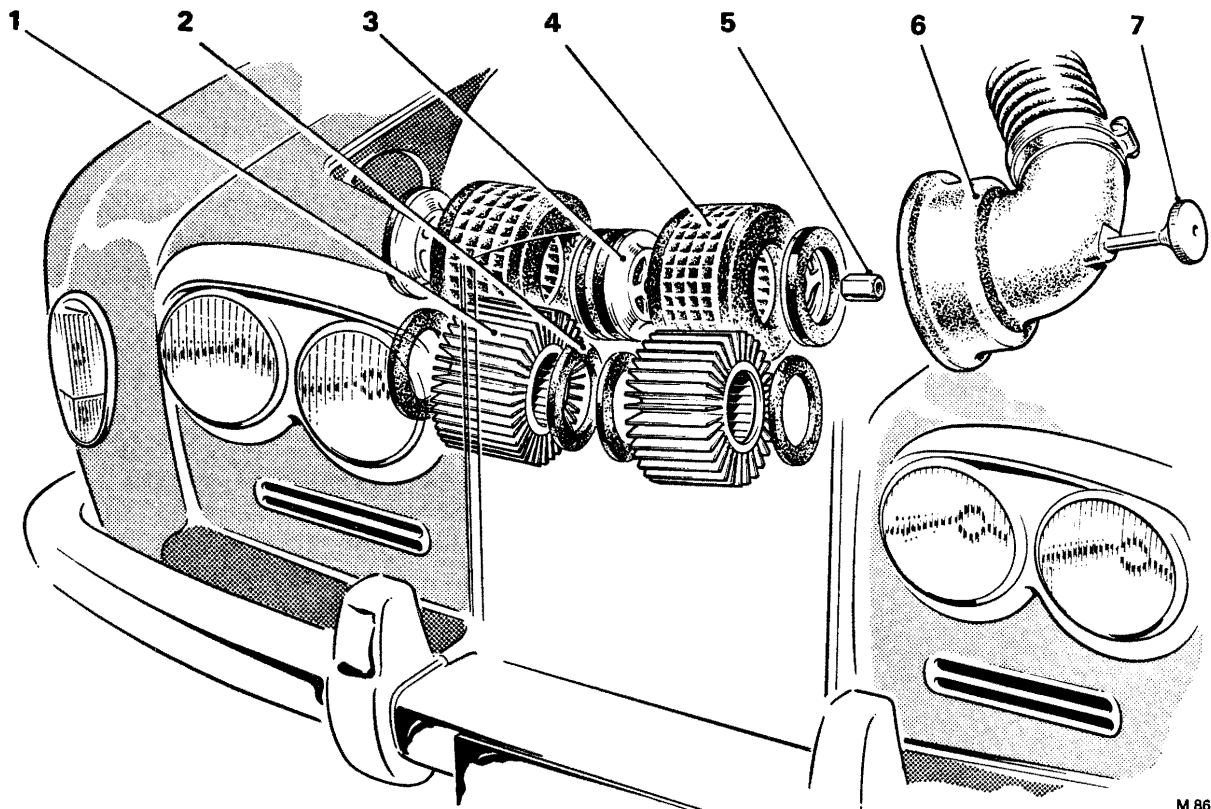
EXPLODED VIEW OF THE AIR FILTER
